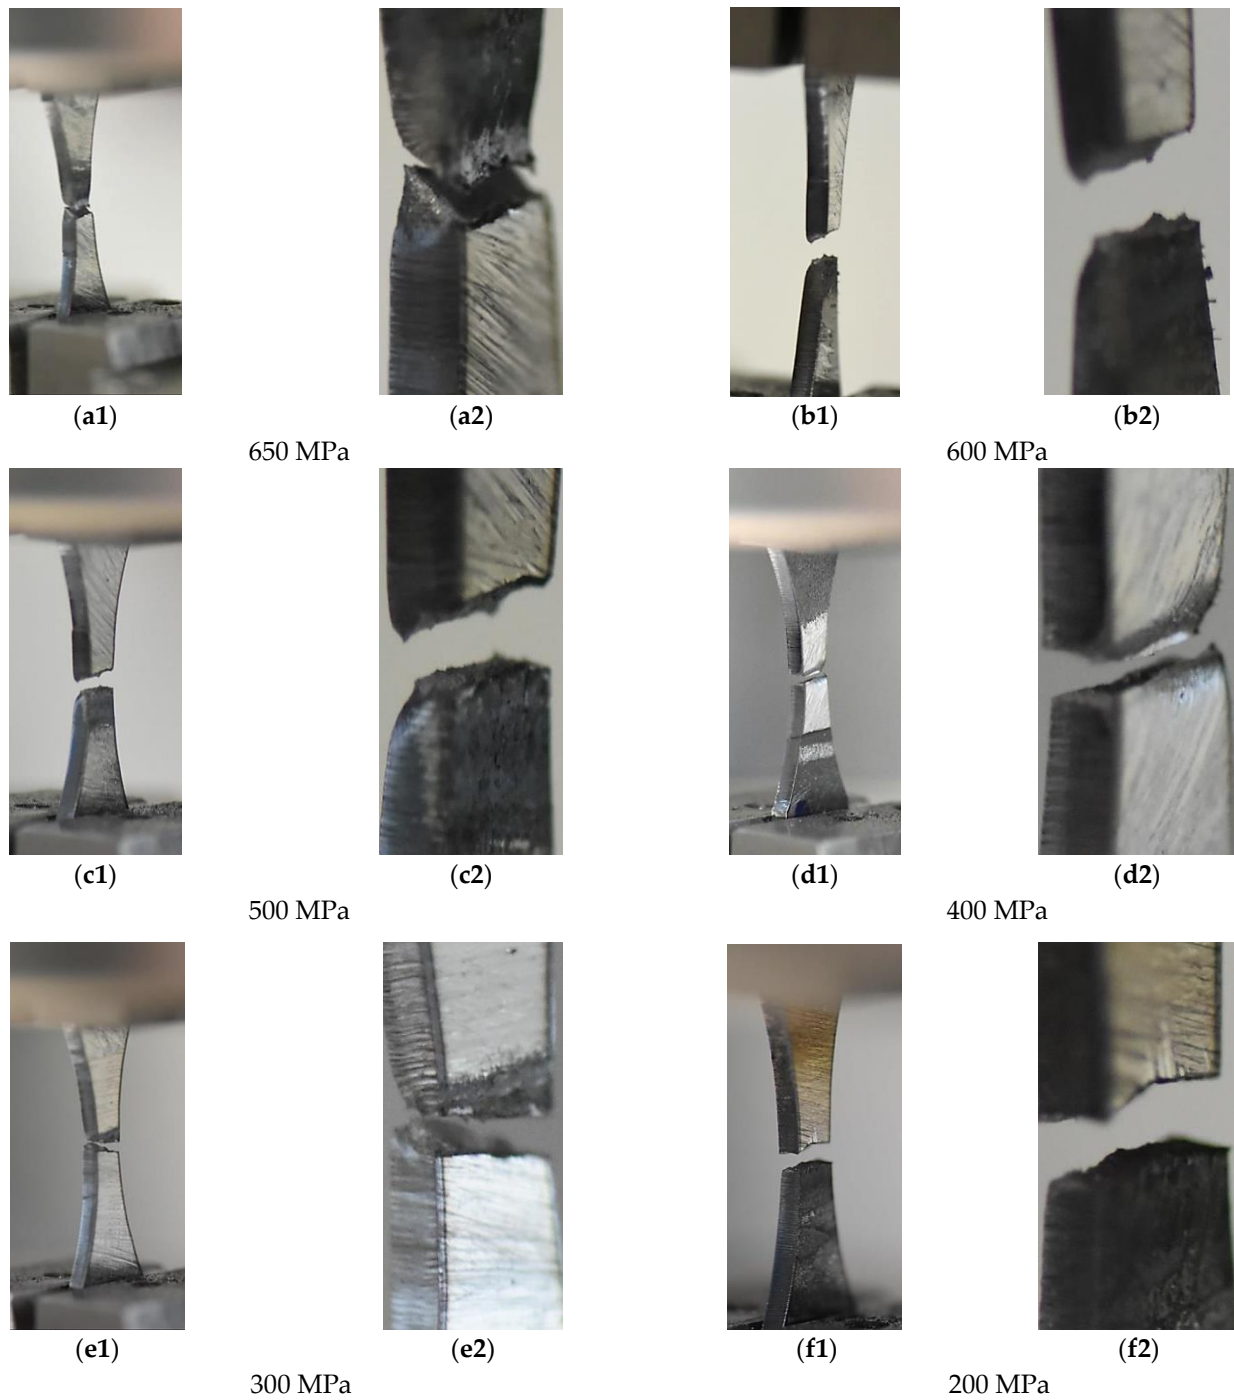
S960MC mini-specimens with the micro-jet cooling weld manufactured with the Union X96 welding wire after the fatigue test for the maximum values of the axial stress amplitude of 650 MPa–100 MPa, (a1–f2) fracture regions.
